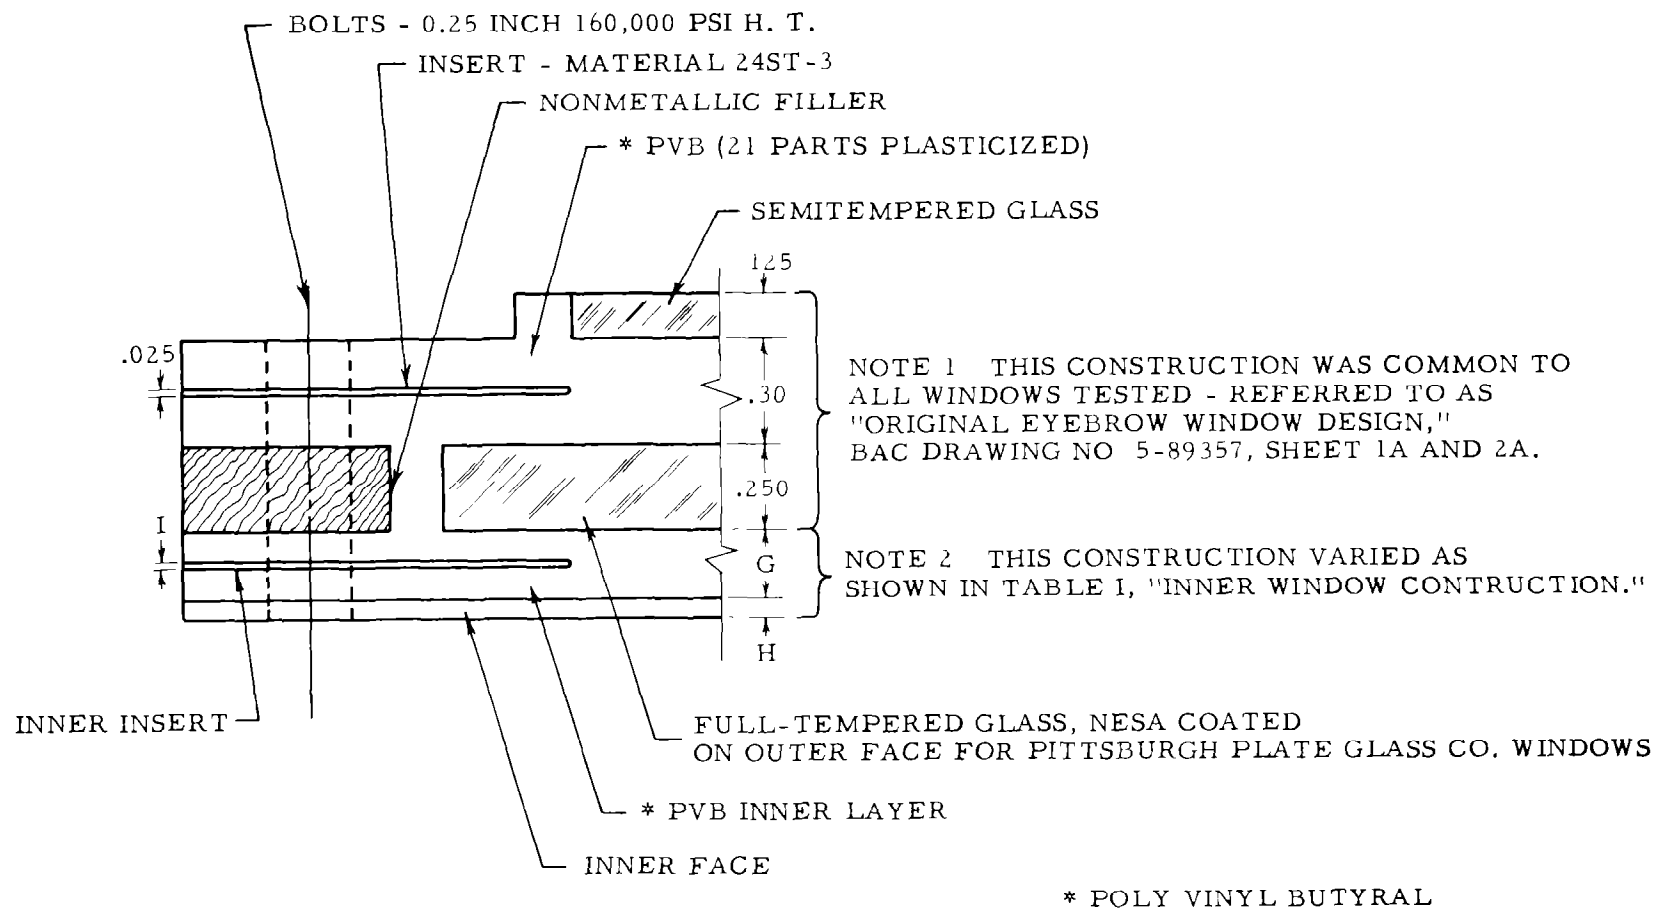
TYPICAL WINDOW CONSTRUCTION
